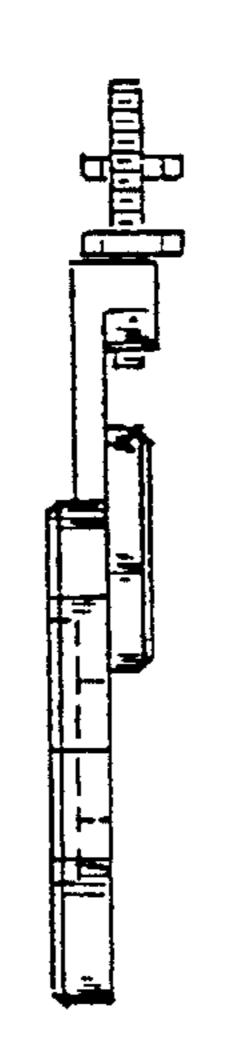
is a reduced back view of the bicycle chain tensioner.
